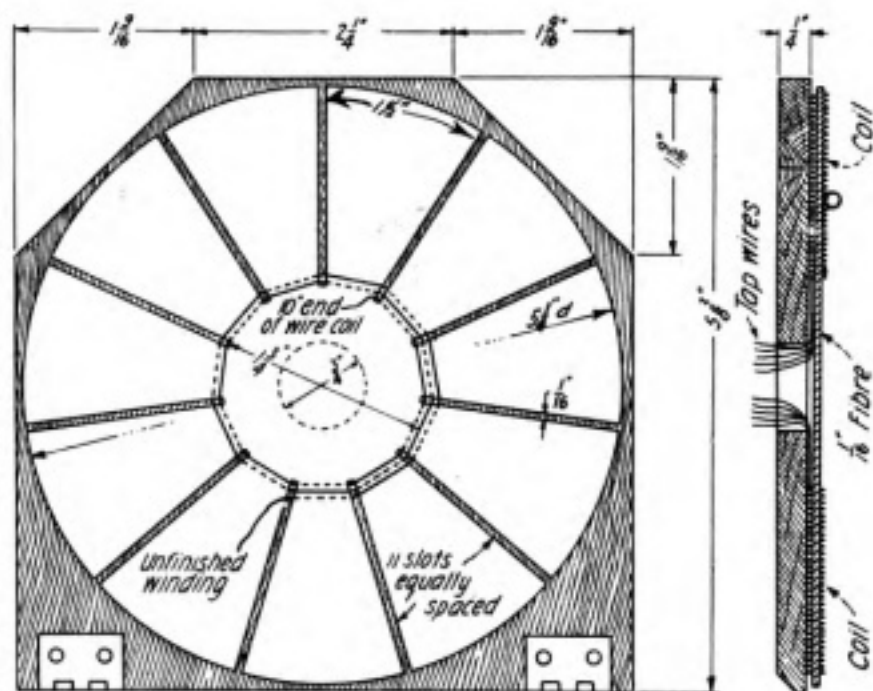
How to cut fibre and hinged board, and how the winding is started
